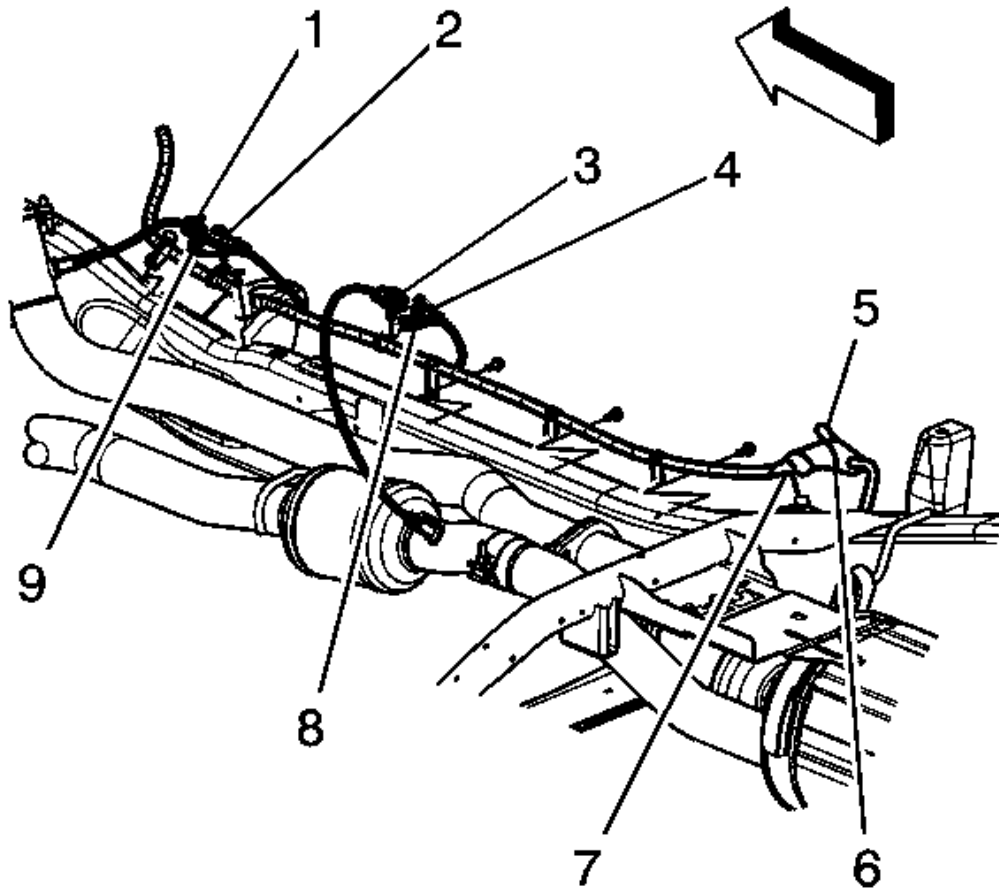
View Of Rear HO2S, CPA Retainers & Electrical Connectors
